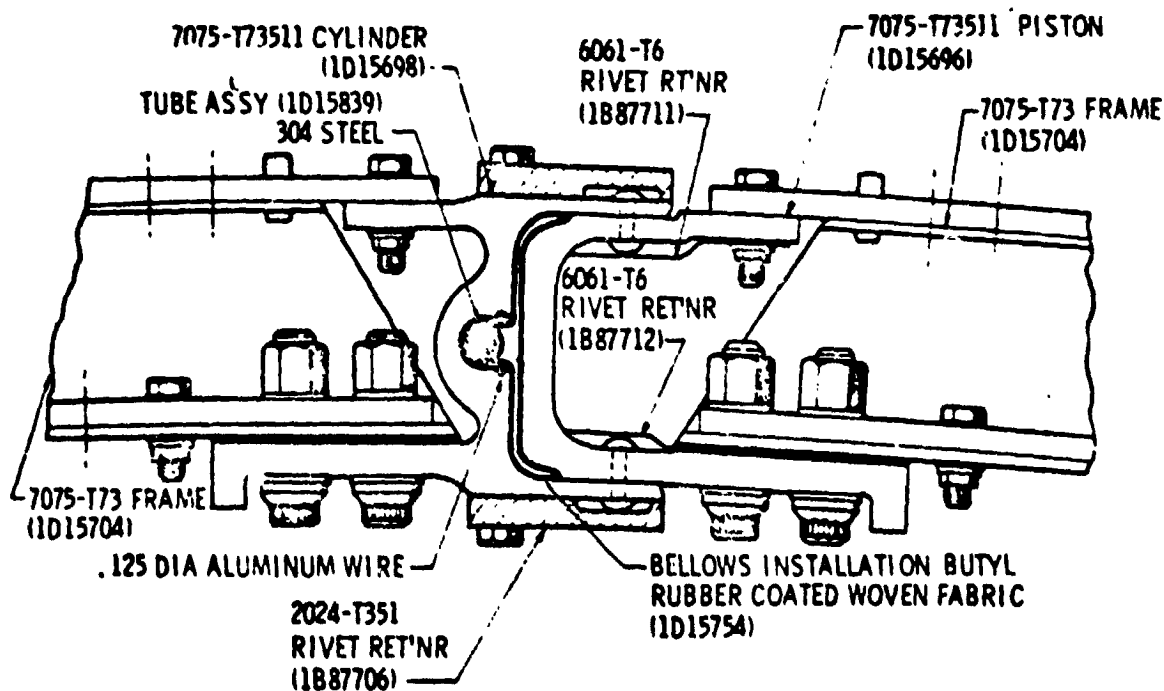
Payload Shroud Thrusting Joint
